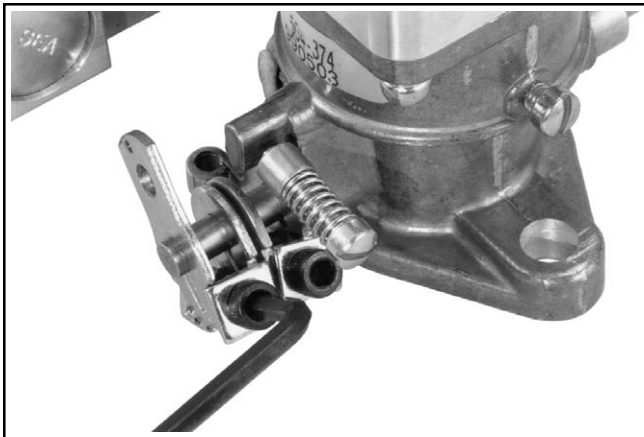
A-14. Tightening Throttle Linkage Clamp Bracket.
